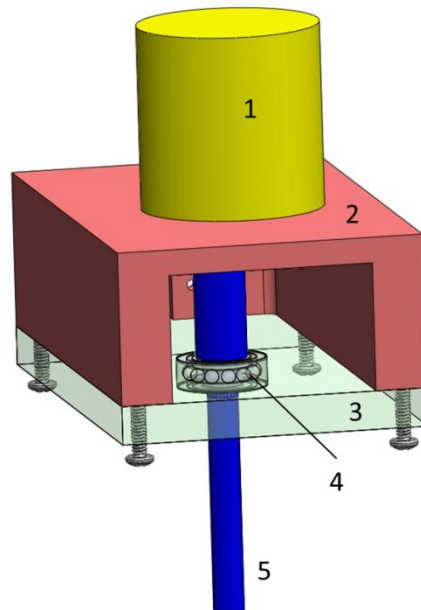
Inside view of the motor, shaft, and bearing assembly.
